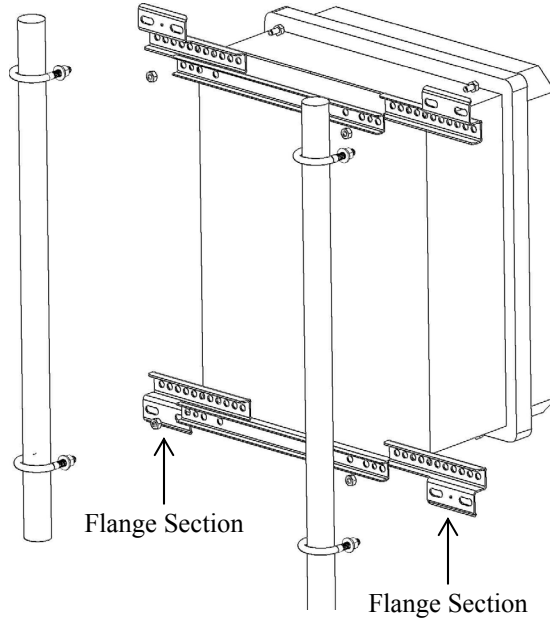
This exploded view shows the components of a "-TM" bracket option
